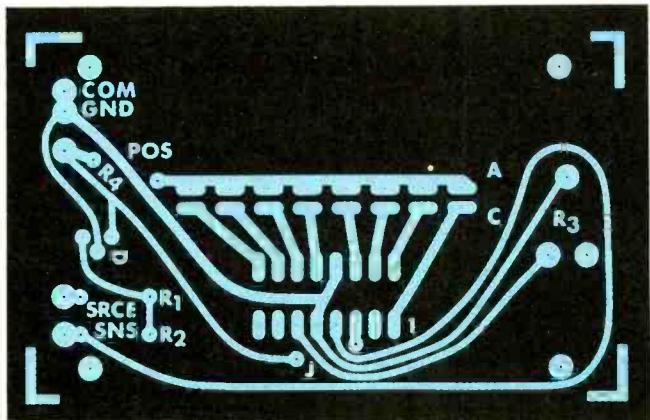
Same-size etching and drilling guide for pc board is at top. Component placement directly above.
